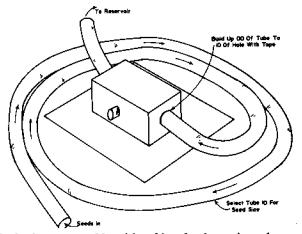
Sensor assembly with tubing for large, irregular seeds.
